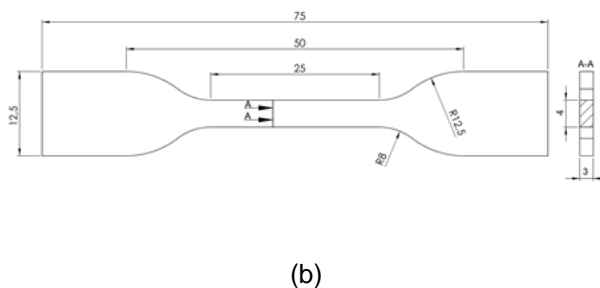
b ISO527-2-5A specimen geometry and dimensions [mm]
